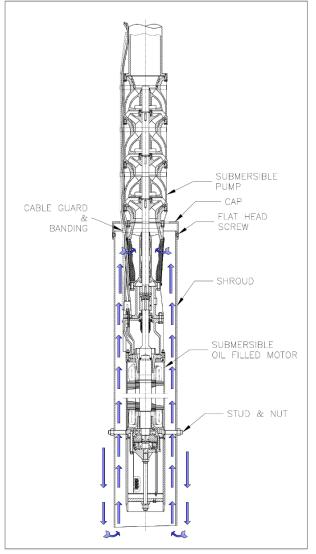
Pump and Motor Installed with Flow Shroud
